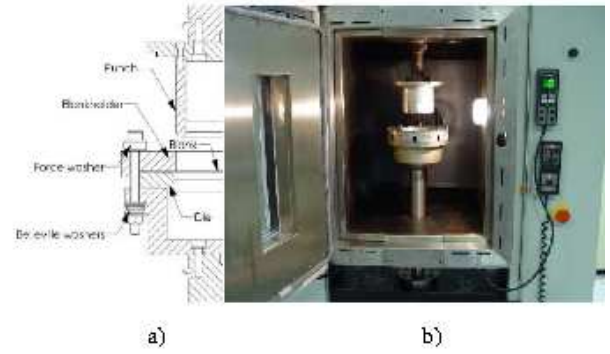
a) Schematic drawing of the experimental device. b) Device in the furnace.
